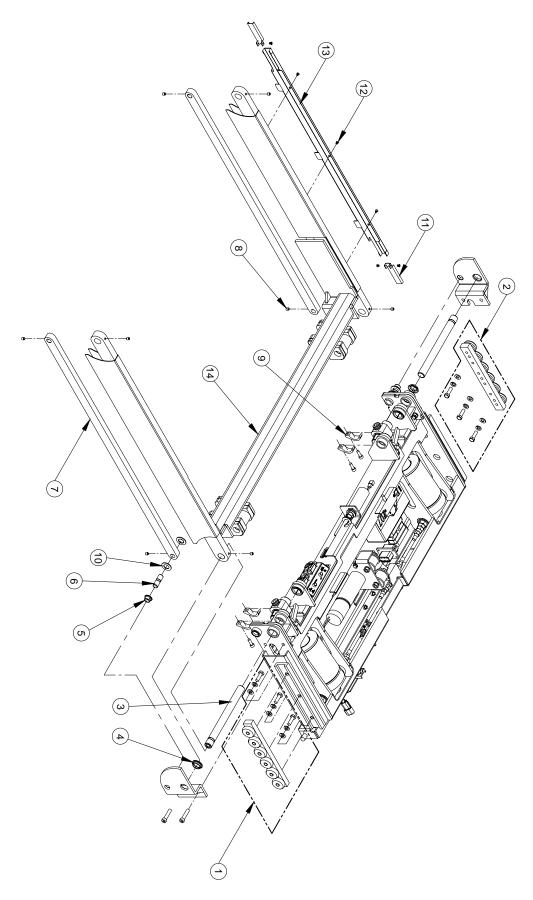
TRAVELING FRAME ASSEMBLY
